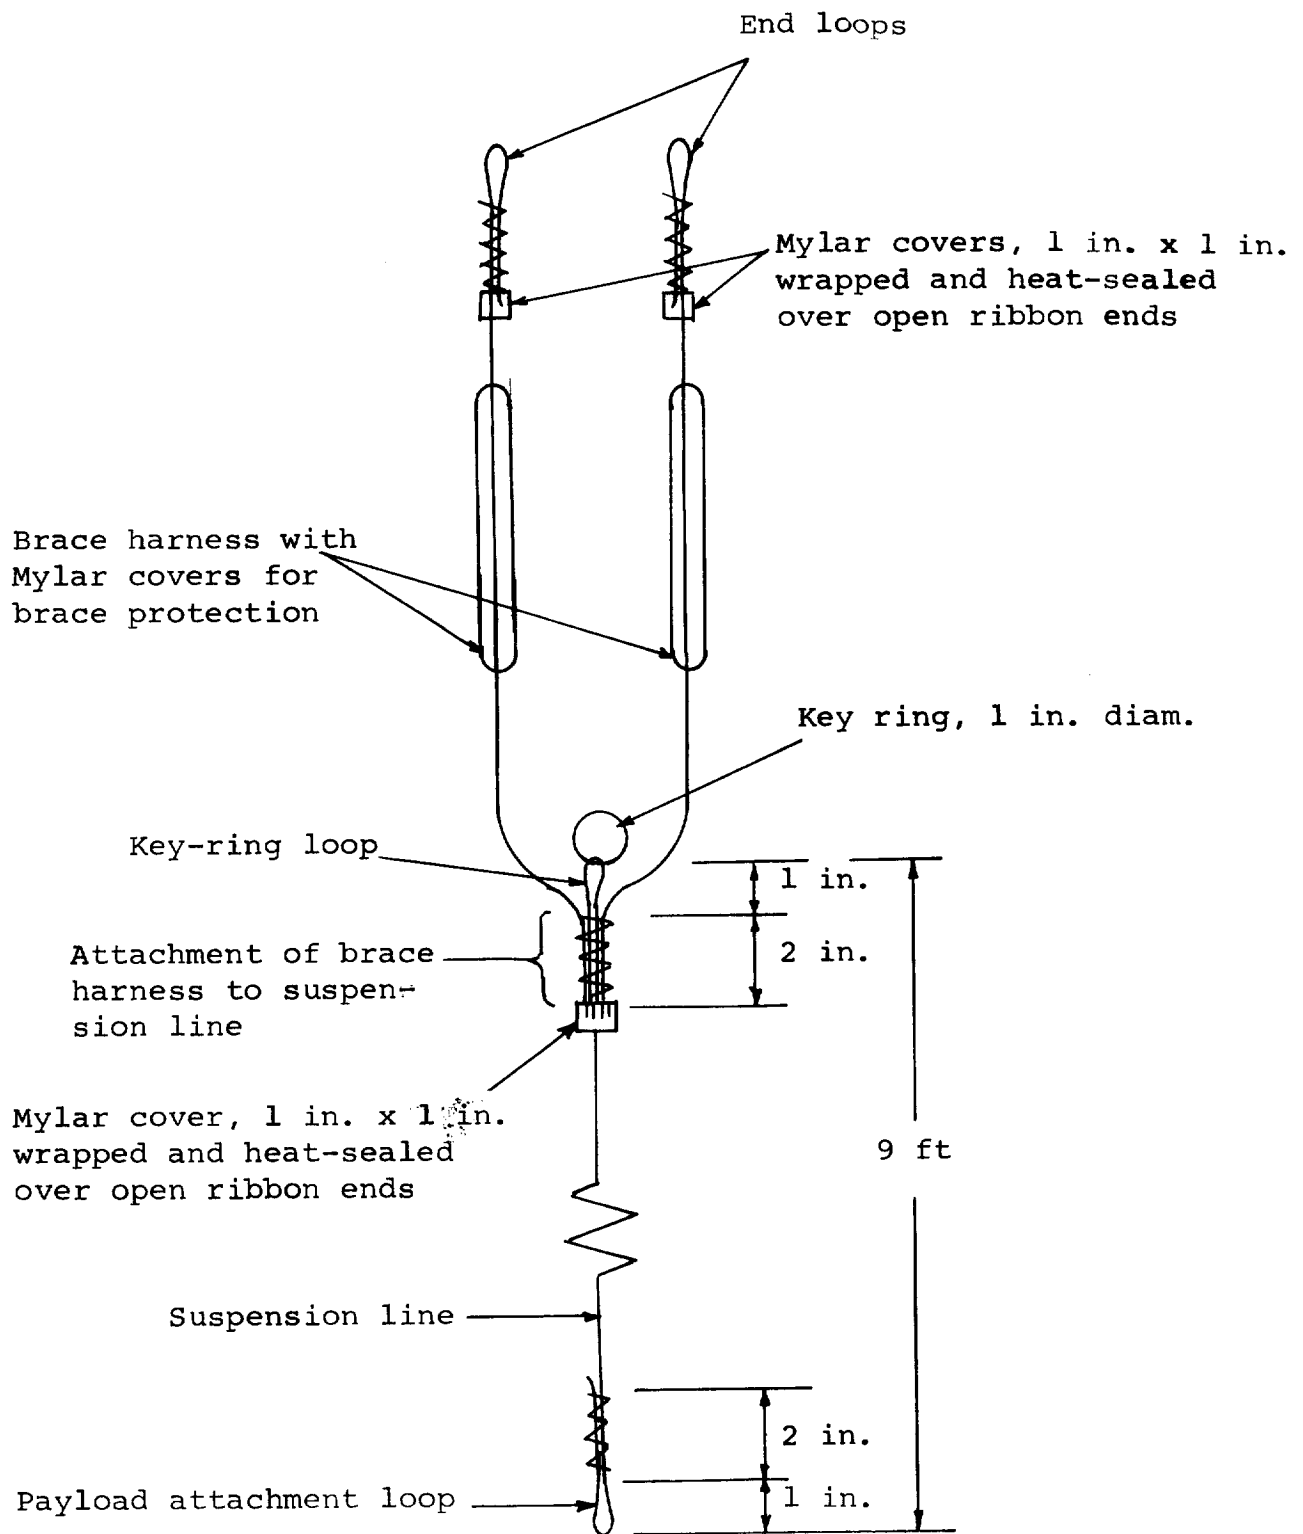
Schematic of Suspension Line Design and Assembly of Suspension Harness
